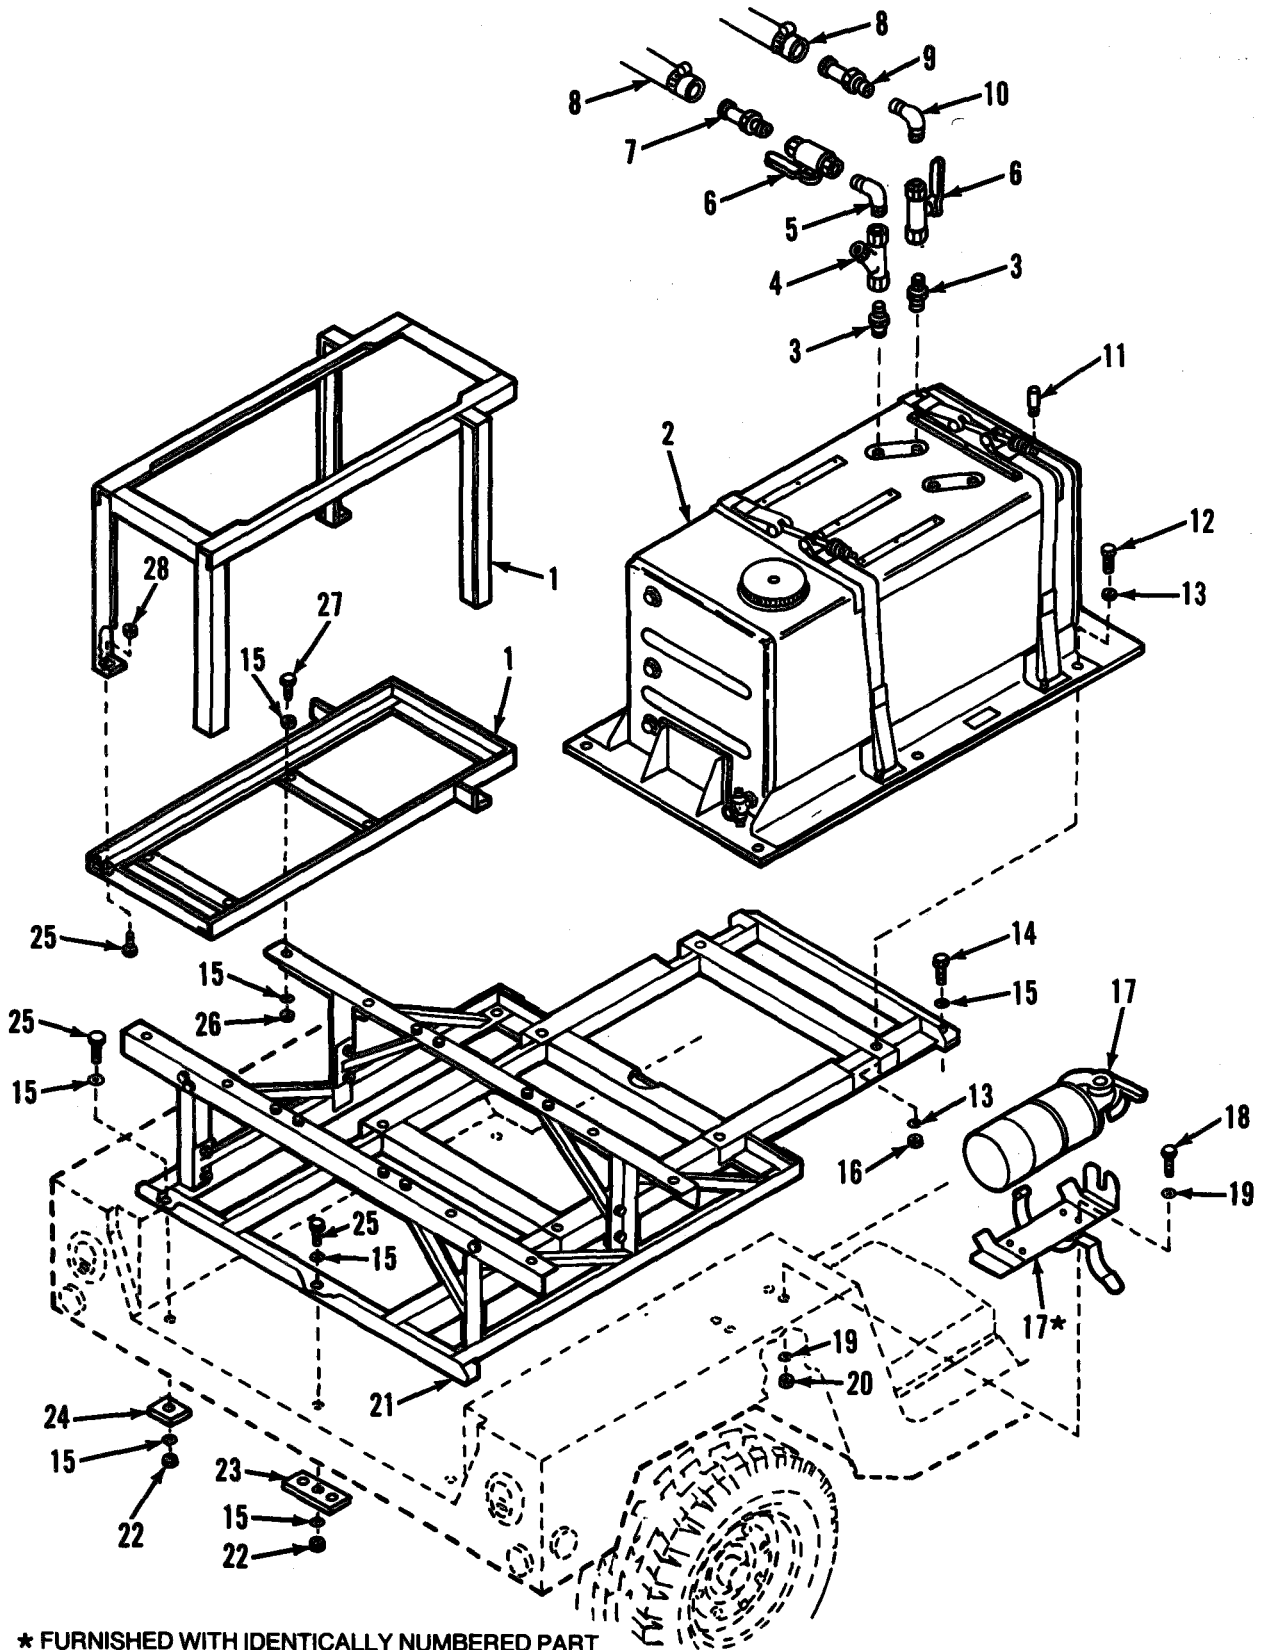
M288 Smoke Generator Mounting Kit, 31-15-2864 (Sheet 1 of 2)
